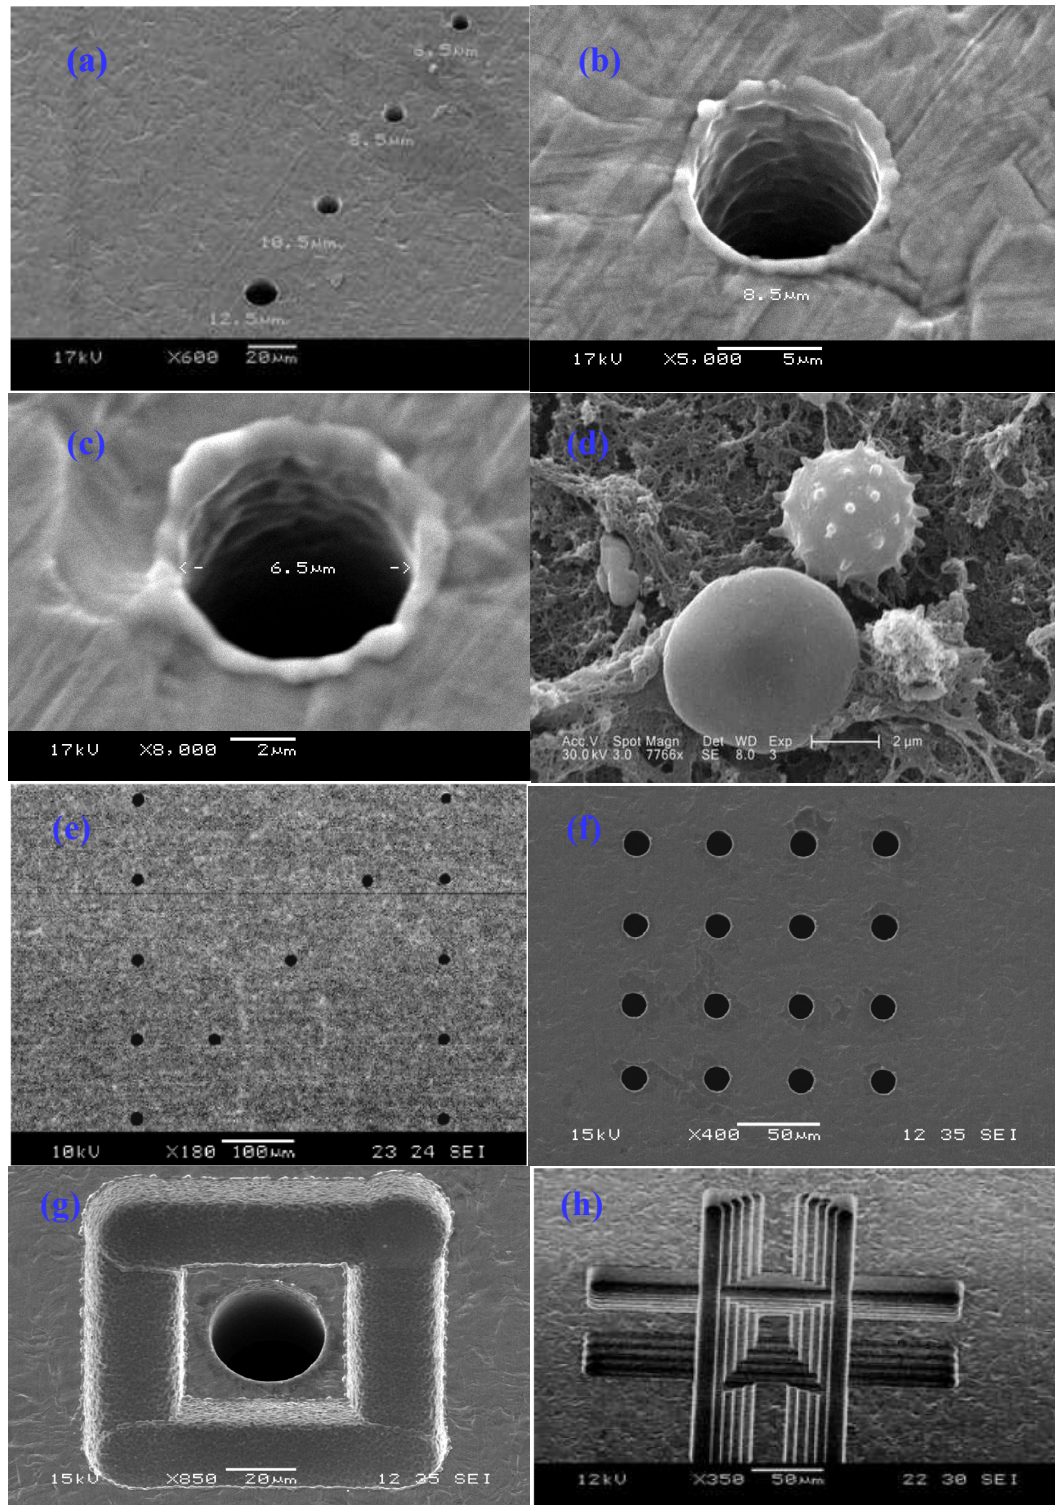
Microfabrication by micro-EDM drilling and micro-EDM milling using electrodes fabricated on-machine by BEDG/MBEDG process (1).
